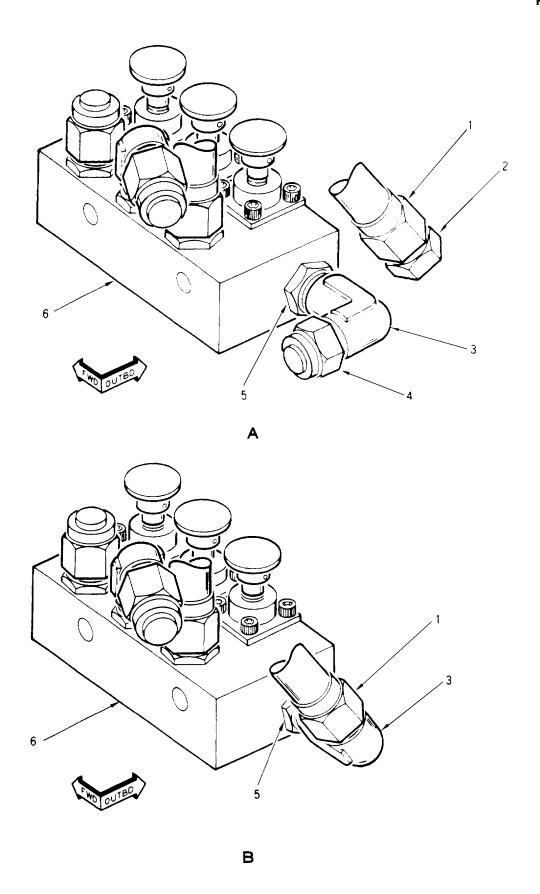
Fuel Level Control Selector Valve Hookup (Sheet 2)
